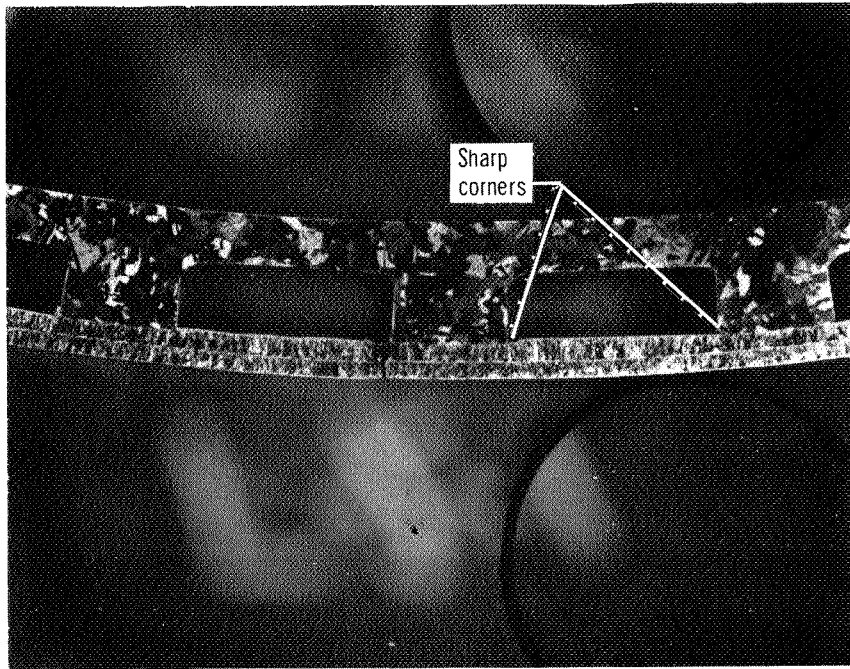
Section showing sharp corners of coolant channels adjacent to chamber 76 closeout. X7.
